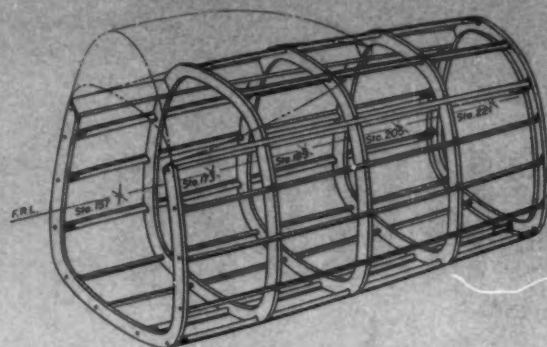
Layout of structure becomes the master structure drawing for making installation drawings
